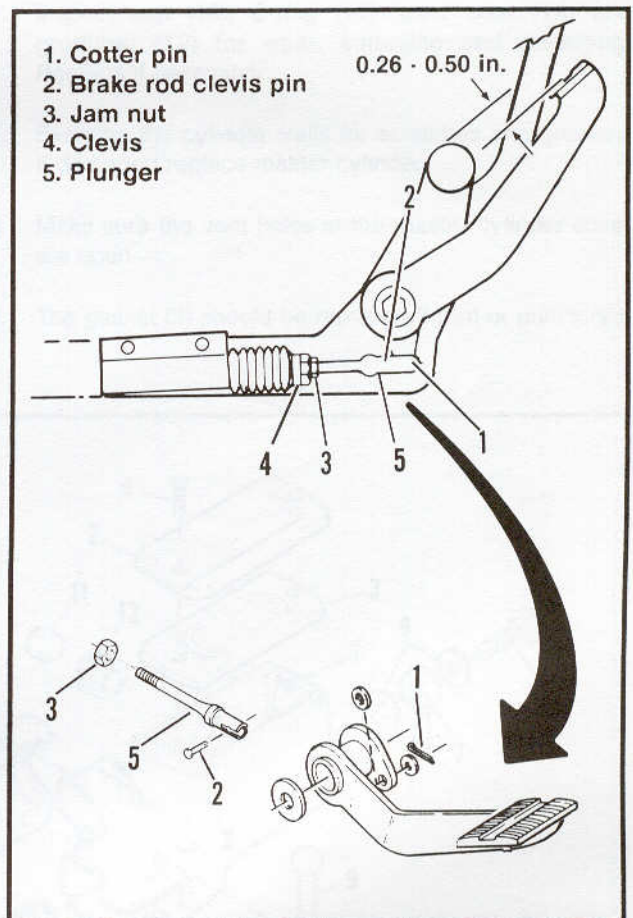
Rear Brake Pedal Adjustment - FXSTC/S
